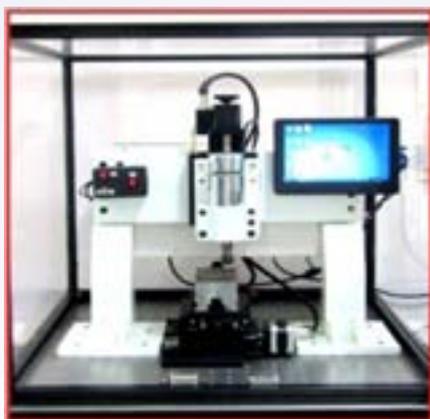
Multi-Fab Micro Fabrication Machine
